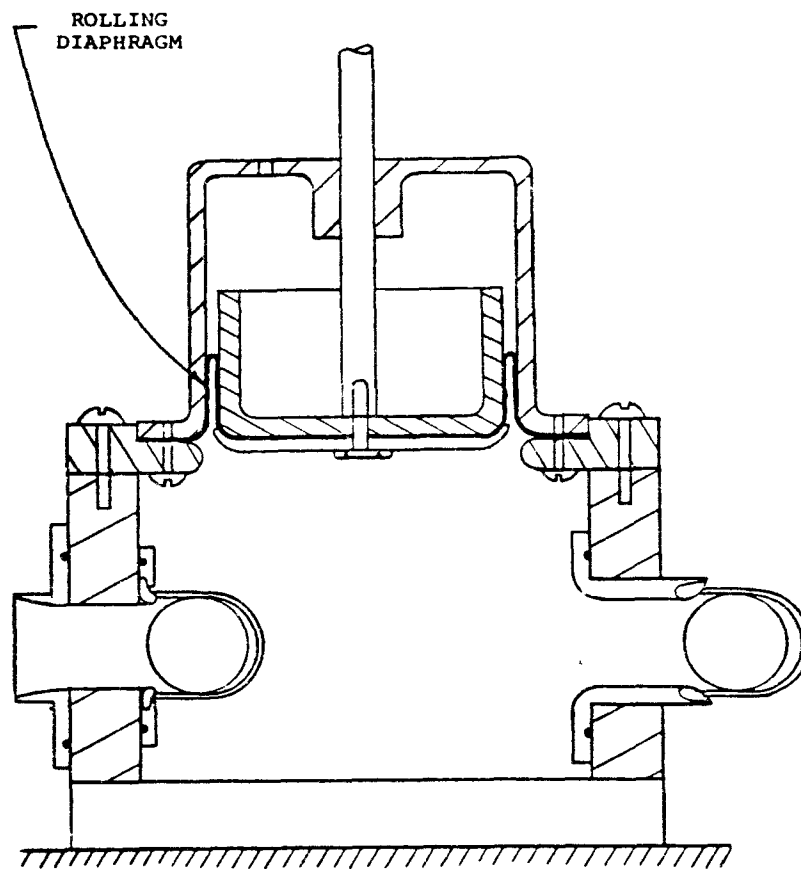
Location of the Rolling Diaphragm Inside the Pump Housing³⁷
